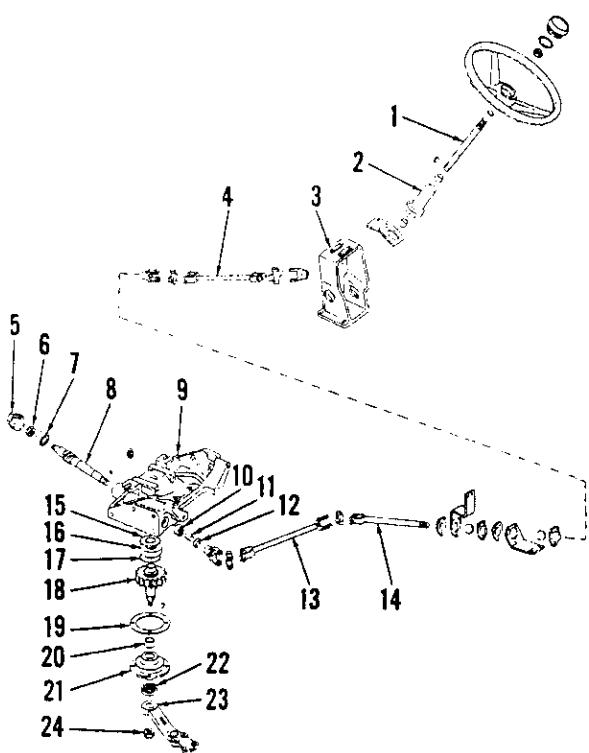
Exploded view of mechanical steering gear assembly used on Series 424 and 444.
